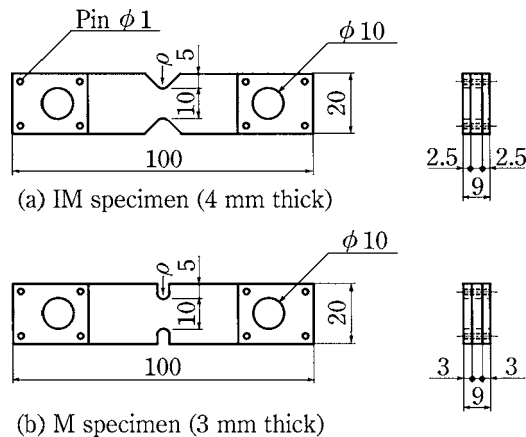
Test-specimen dimensions (mm); (a) IM specimen, (b) M specimen.
